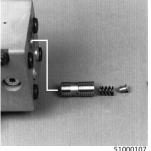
Remove Adjustment Spring and Pilot Piston
